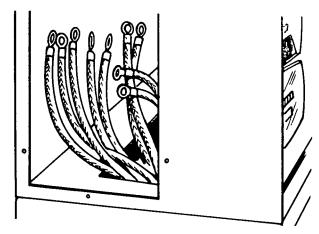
CONTROL BOX (SIDE PANEL REMOVED)
